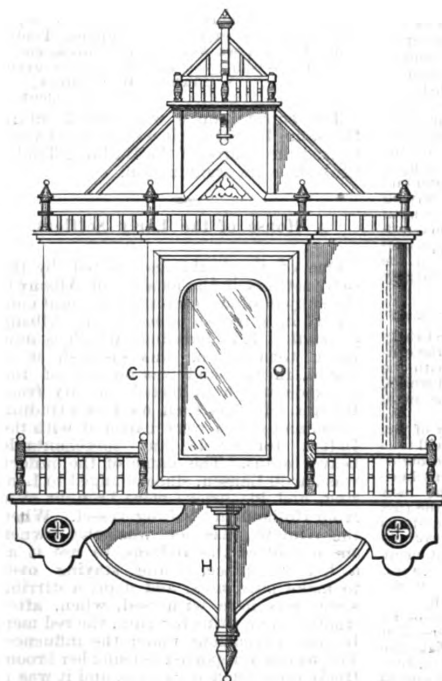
Front Elevation.—Scale, 1 Inch to the Foot.
